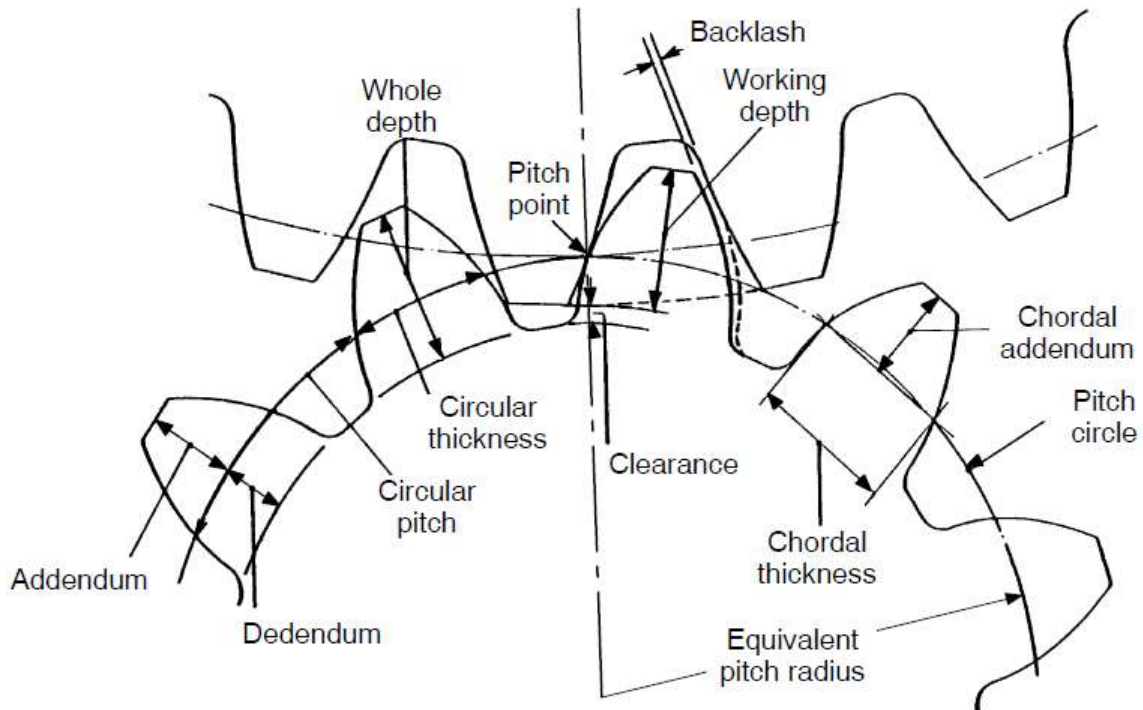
Bevel gear nomenclature -- mean section (A-A in figure 11)
